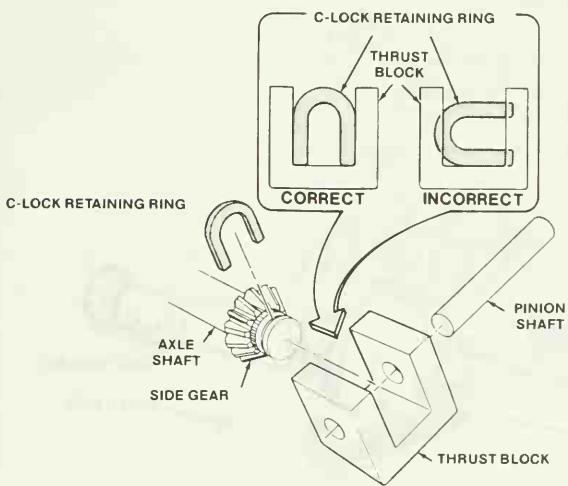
An axle may use a retainer at the side gear end. (GMC Truck and Coach Division of General Motors Corporation)
